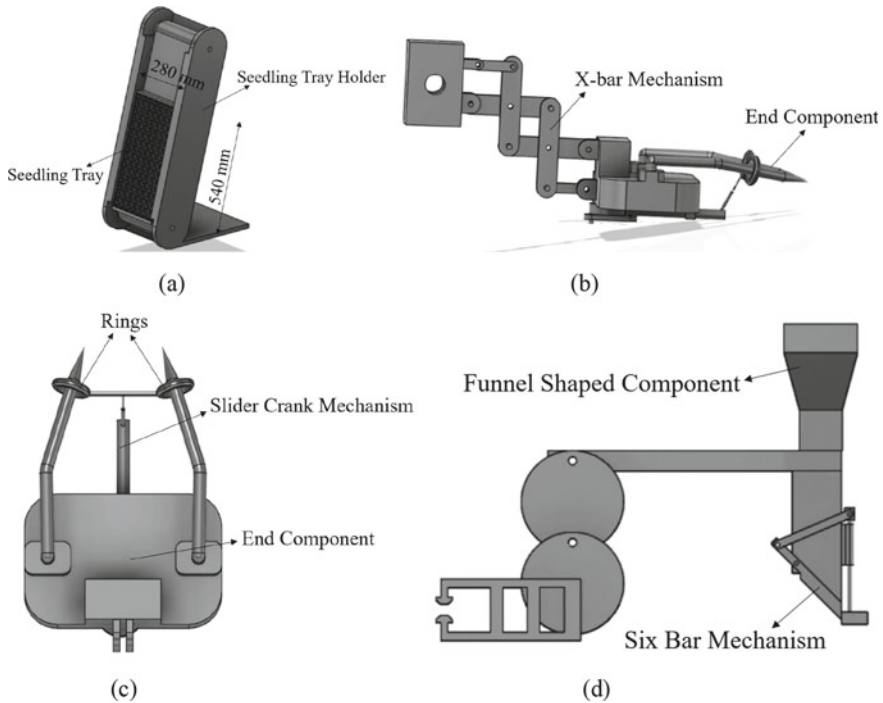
Transplanting mechanism components a seedling tray with holder; b gripper; c end component; and d planter
